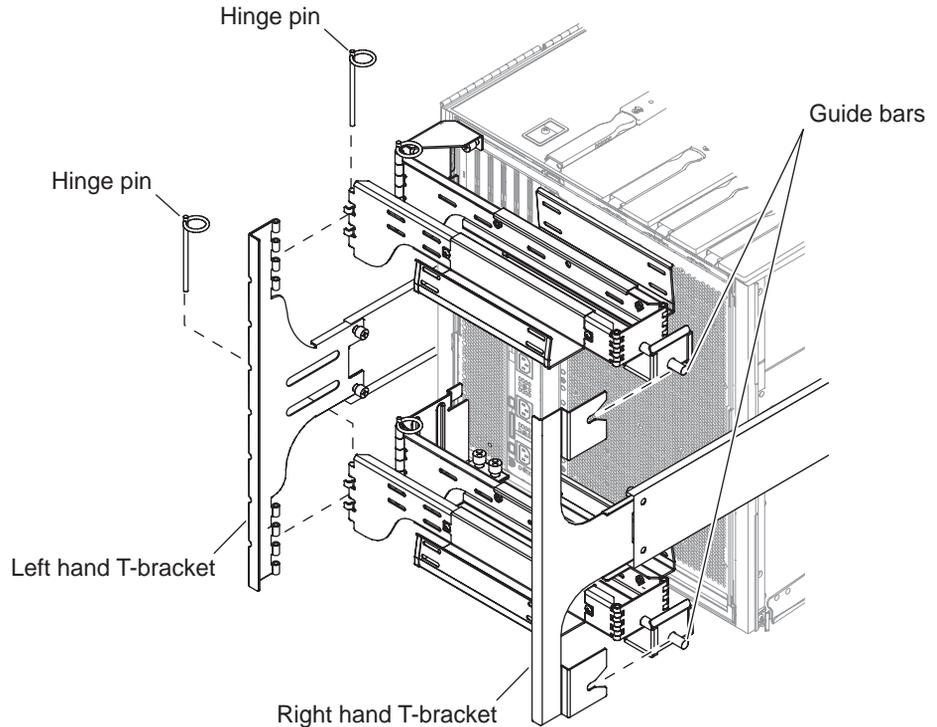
Attaching the Upper and Lower CMA Arms to the T-Brackets.
